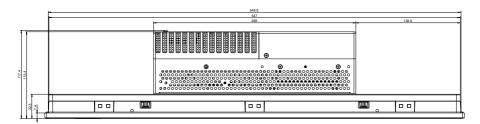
Housing dimensions of the device VR4x21, top view
